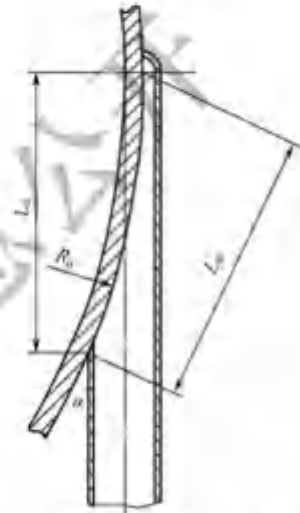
Connecting weld between support column and spherical shell
